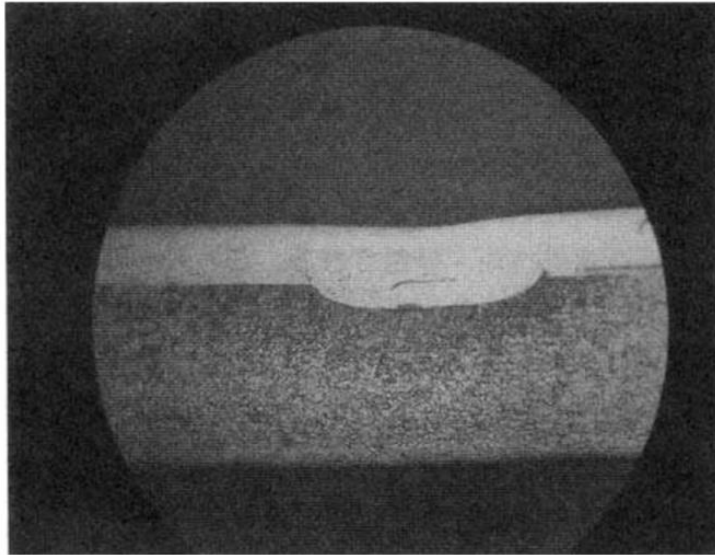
Cross sectional photo of micro-resistance weld (Nickel (0.15 mm) × nickel-plated iron (0.35 mm thick)).
